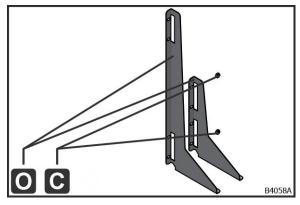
Installation material for support brackets for maintenance friendly filter assembly
